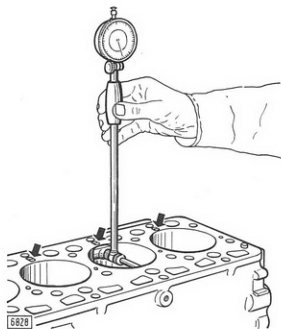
Checking Cylinder Liner I.D. using a Dial Gauge
